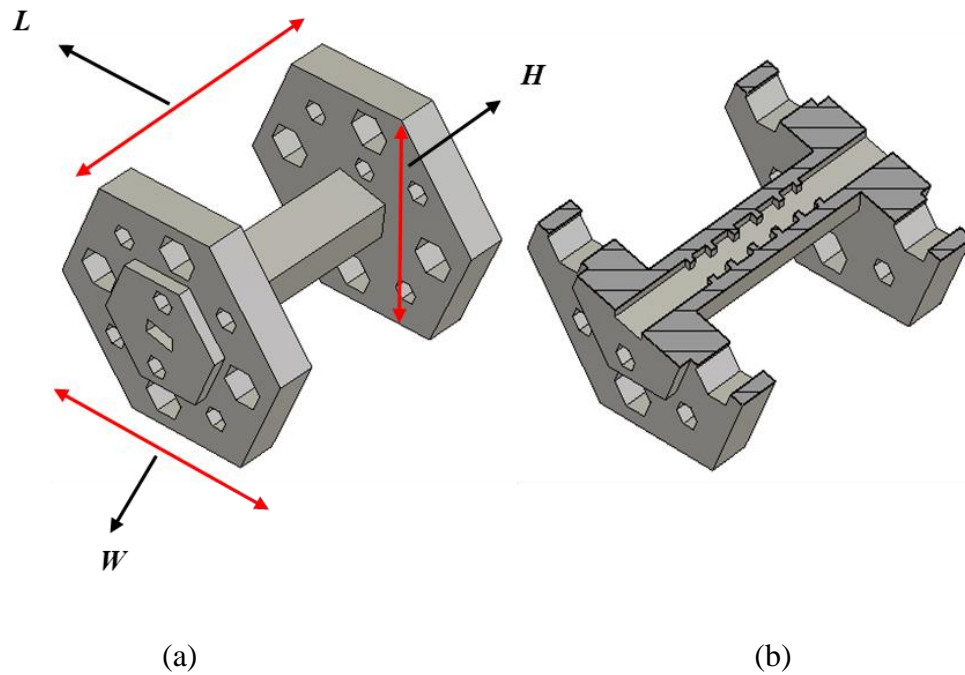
Illustration of the 90 GHz waveguide bandpass filter. (a) Completed filter, showing external dimensions. The dimensions in millimetres are: $L = 21.4$, $H = 19.05$ and $W = 22$. (b) A cross section view of the waveguide filter showing internal couplings and resonators.
